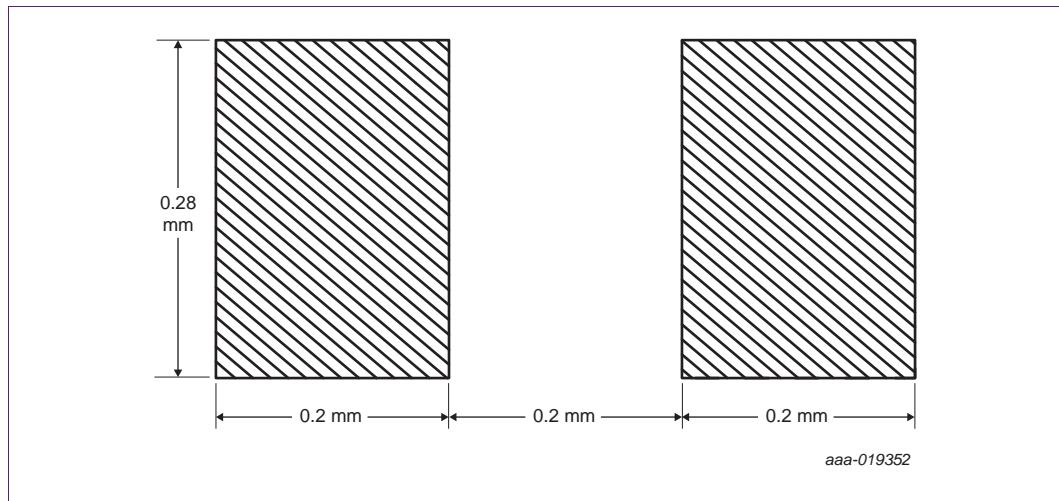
DSN0603-2 (SOD962): recommended reflow solder footprint
